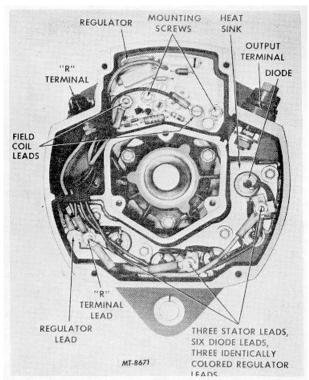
End View, Cover Removed (Early Type Discrete-Component 12-Volt Regulator)
